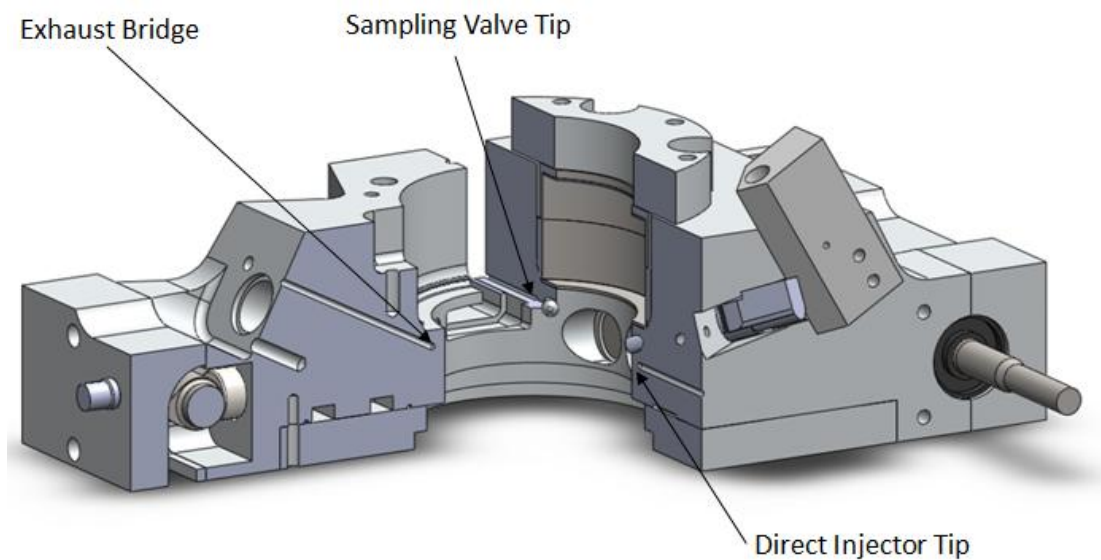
Sectioned view of the cylinder head showing thermocouple locations
